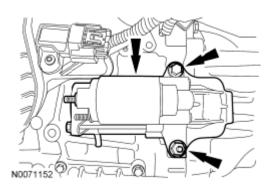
Locating Stud Bolt, Starter And Bolt Courtesy of FORD MOTOR CO.
